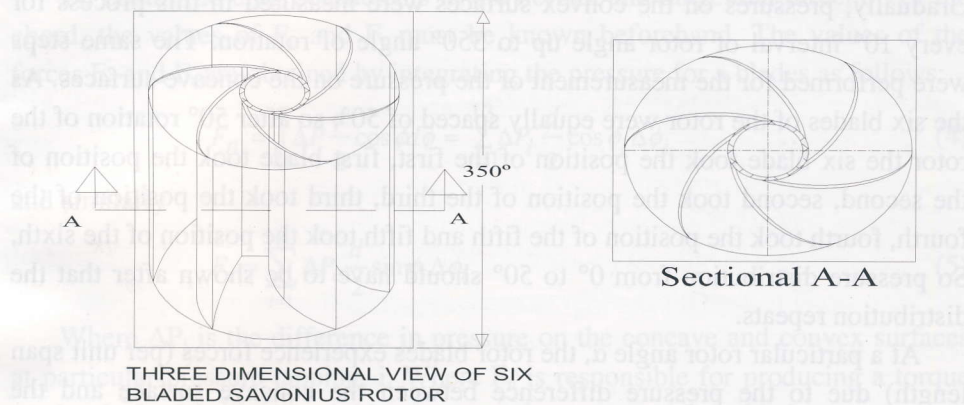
Cross-sectional and three dimensional view of six bladed Savonius rotor.
